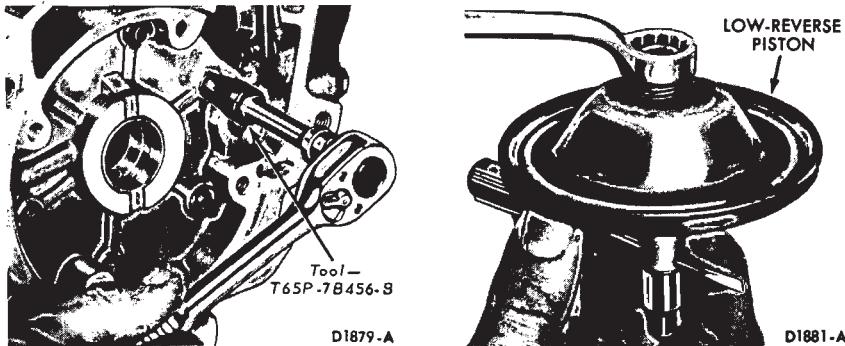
Removing One-Way Clutch Outer Race Attaching Bolts
